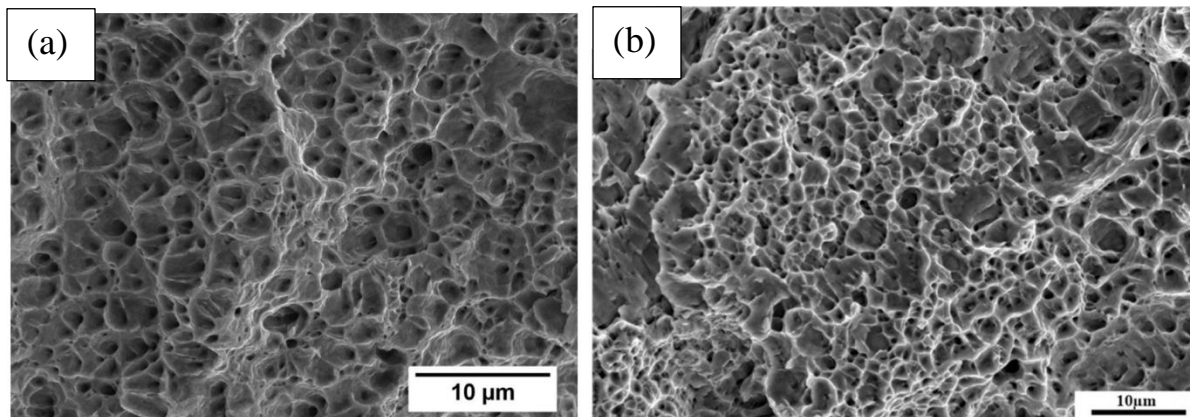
A tensile fracture sample with high levels of ductile failure leading into a shear face at the final fracture surface.
